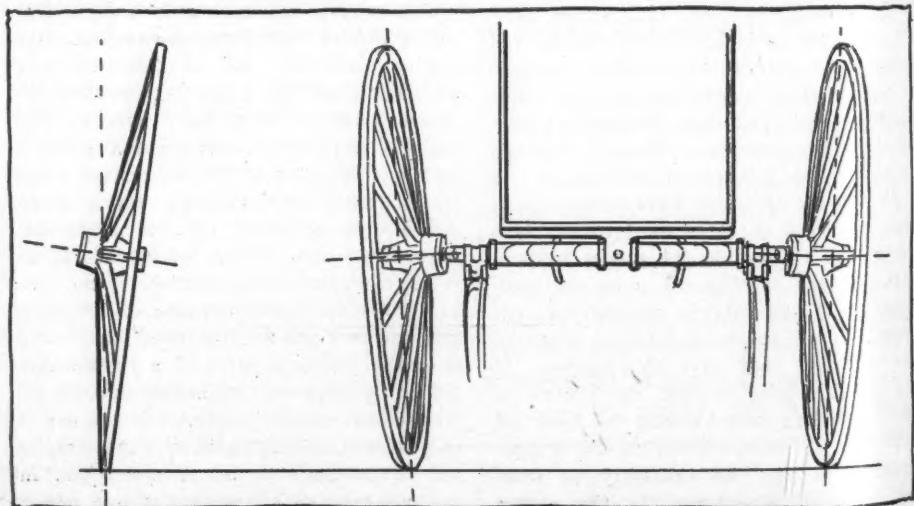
CARRIAGE WHEELS WITH DISH, CAMBER AND GATHER
